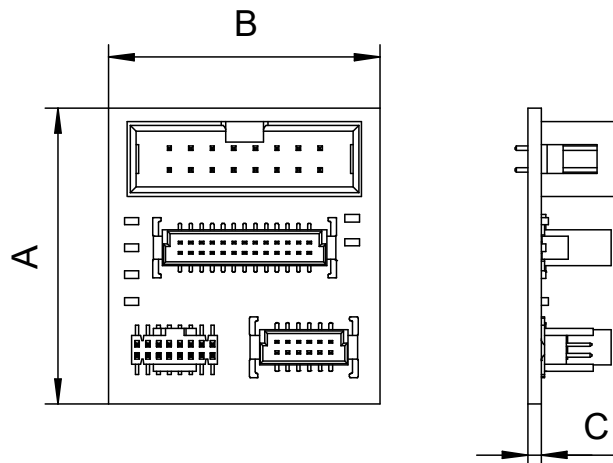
ETAF9 - Mechanical Dimensions and Component Placement
